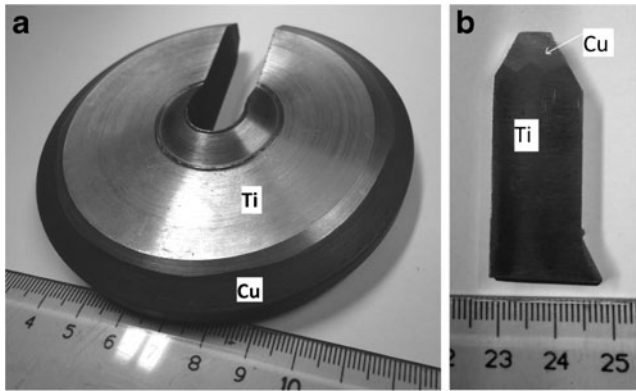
Multilayer Ti–Cu object (a) and its cut fragment (b) fabricated by convenient cold spray system. Surface of part was machined by turning after cold spray deposition
